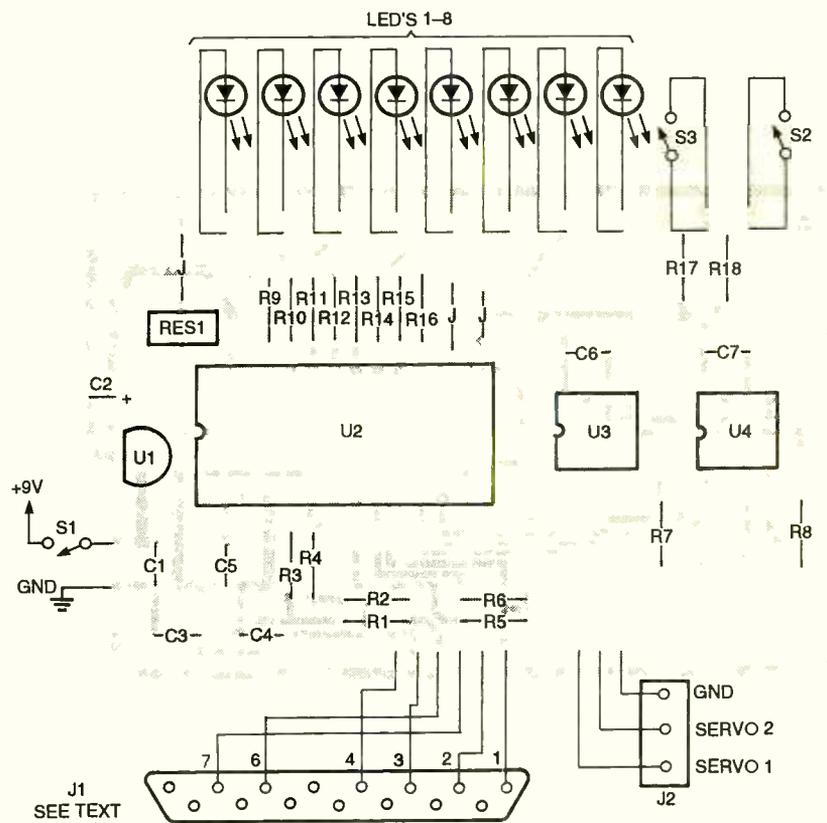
Assemble the Motion Memory's printed-circuit board following this parts-placement diagram. It is recommended that sockets be provided for U2-U4. Don't forget to pay close attention to the orientation of the polarized components.
